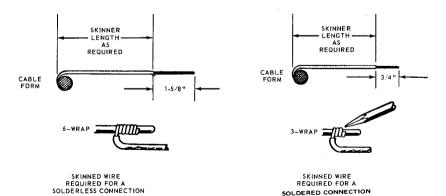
Skinned Lengths Required for Solderless and Soldered Wire Wraps.
